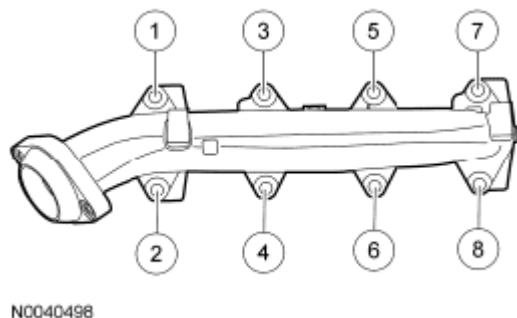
Identifying RH Exhaust Manifold Nuts Tightening Sequence
